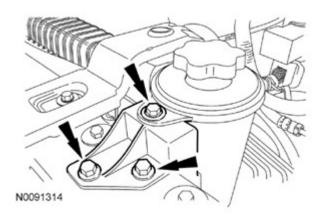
Identifying Cable Routing Clip And Hood Latch Bolts Courtesy of FORD MOTOR CO.
